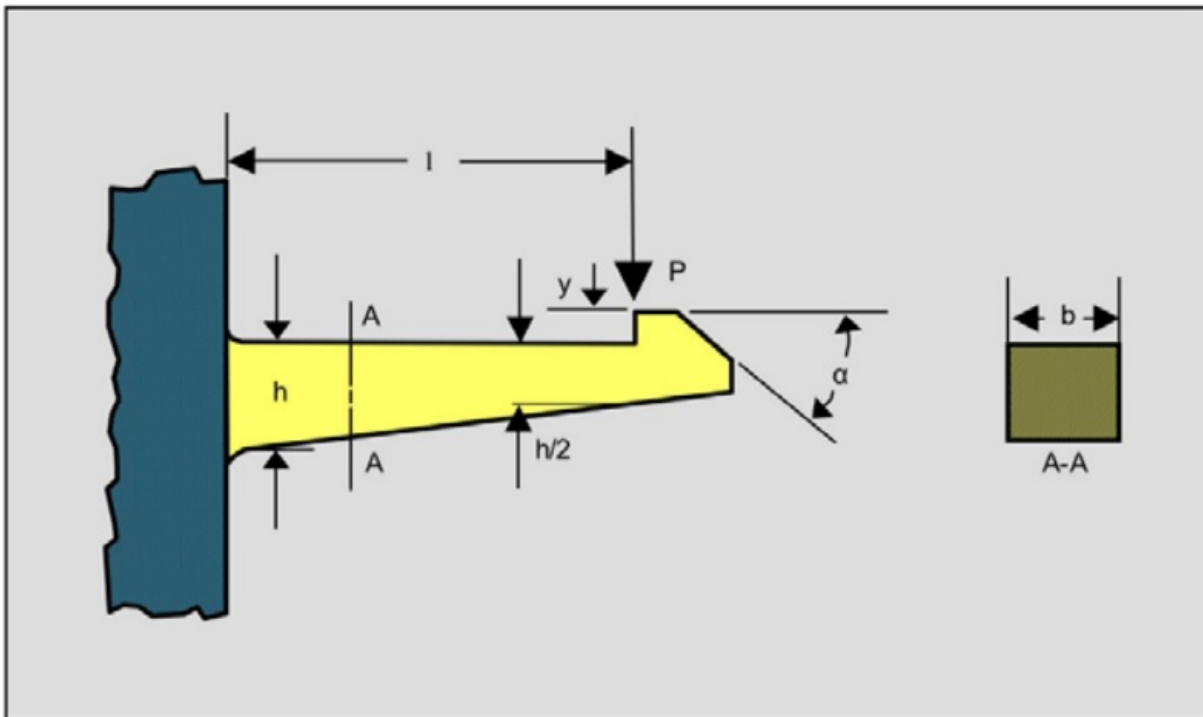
Rectangular cantilever snap-fit with decreasing section.
